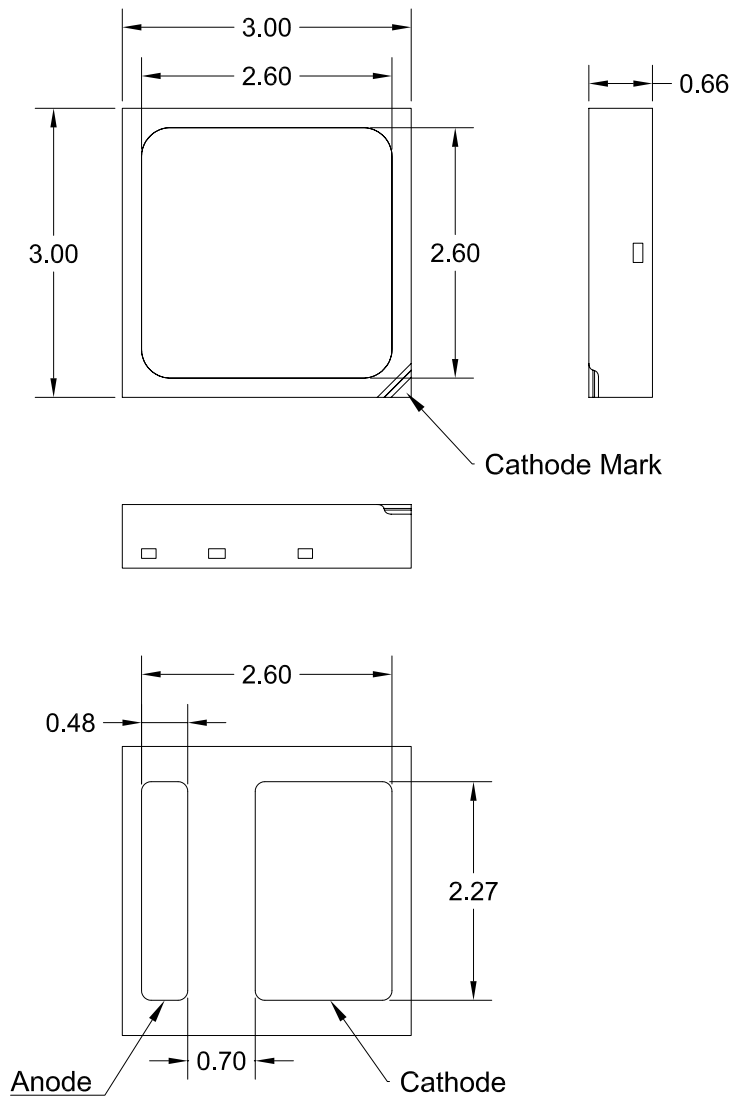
Mechanical dimensions for LUXEON 3030 HE Plus.
